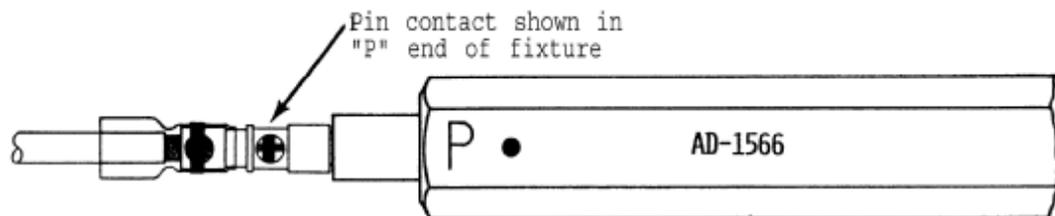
Contact Inserted into AD-1566 Repair Holding Fixture
